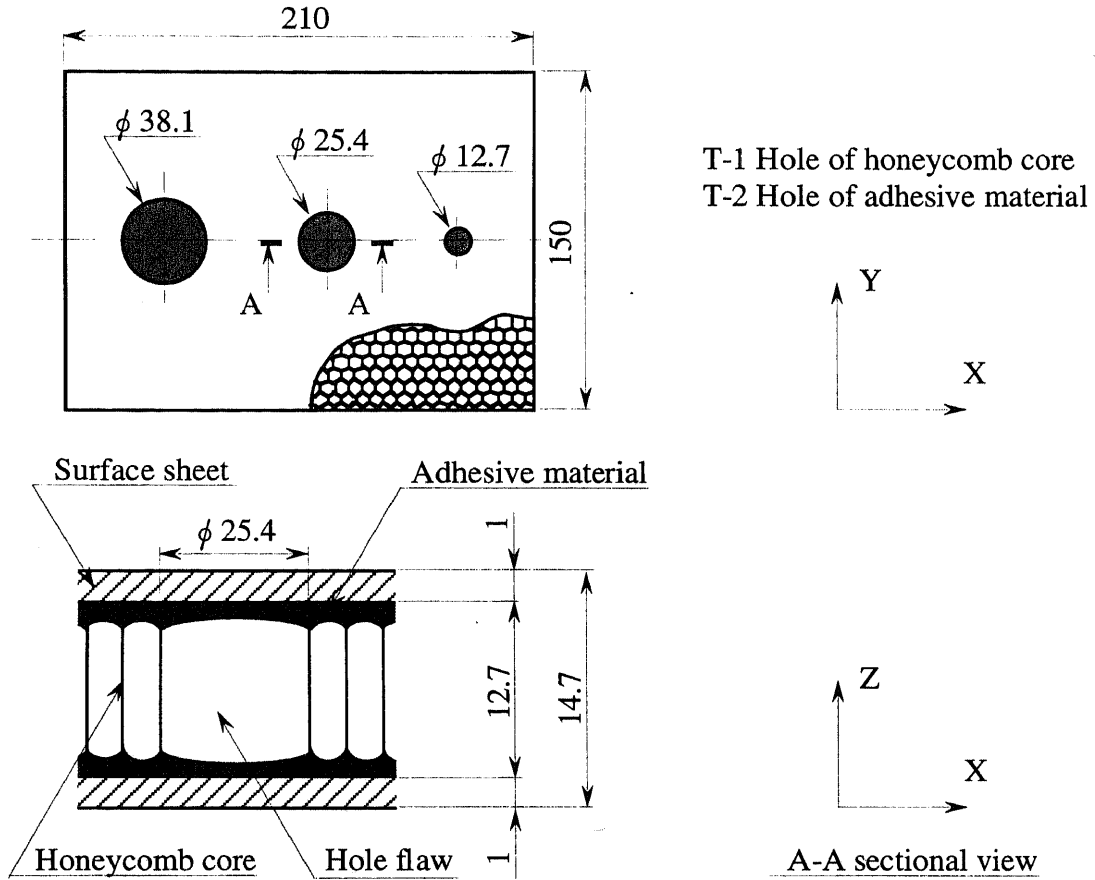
Outline of specimen T-1 (Hole flaw of core)
